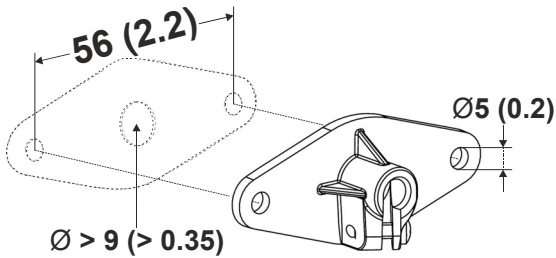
Mounting flange LF-MF, dimensions in mm (inches)
